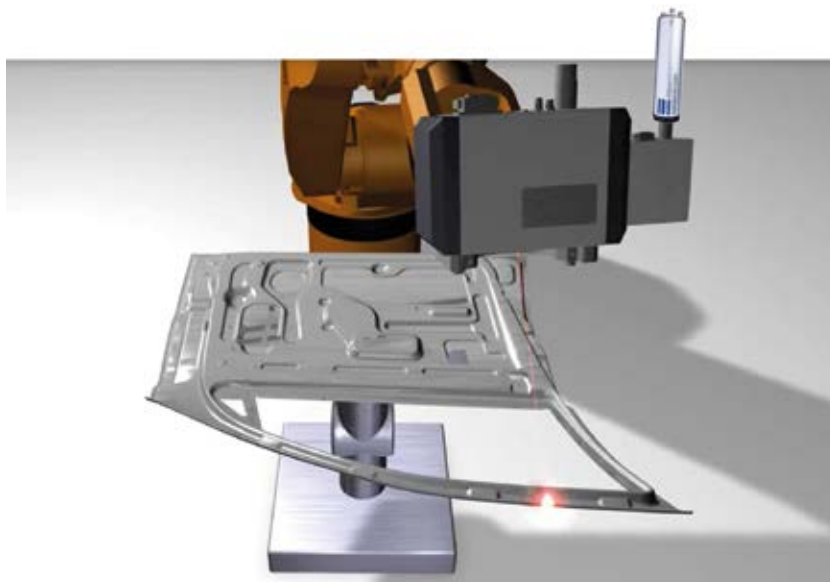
Laser scan welding in car body construction (Source: Hema Electronic)
